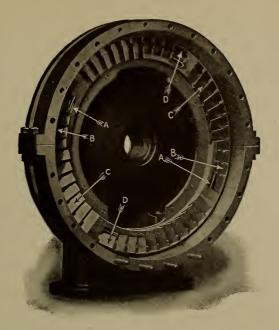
Sturtevant Turbine Showing Reverse Guides in Casing
